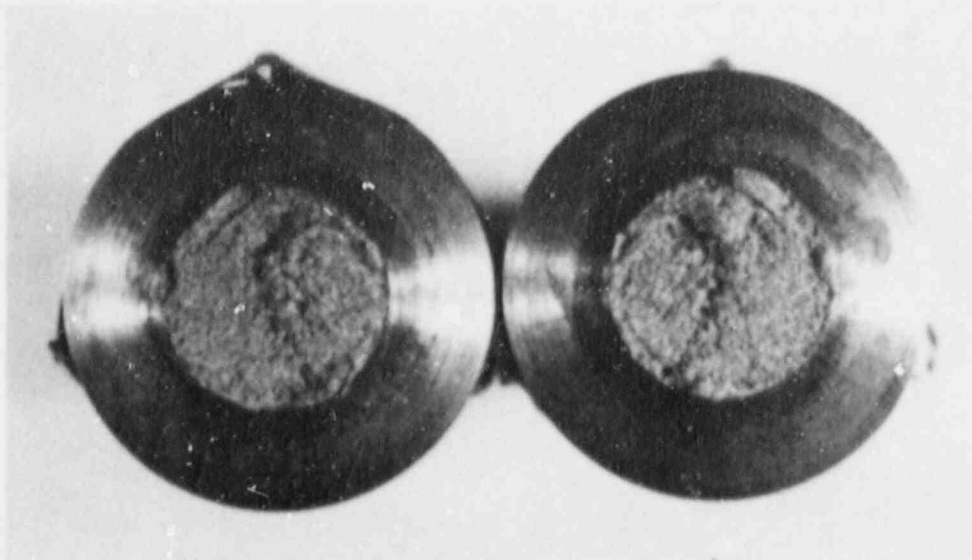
Optical fractograph of fracture surface of specimen DWIT-4.
